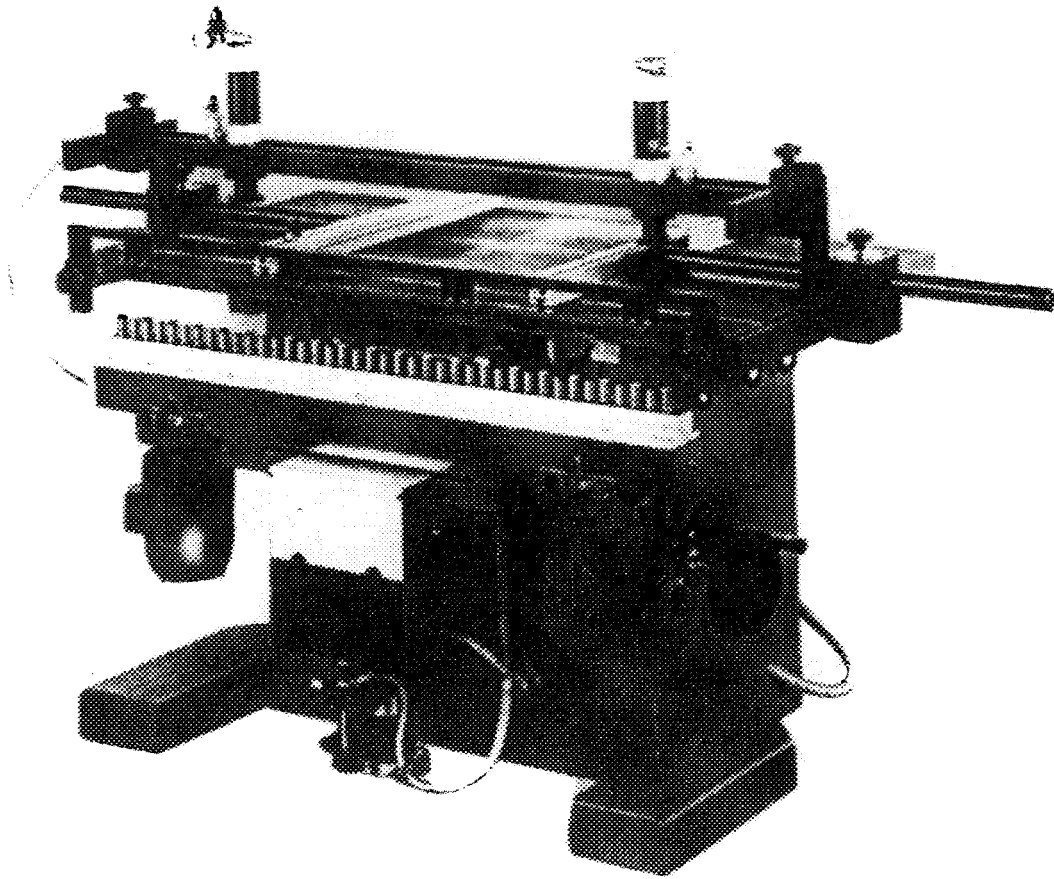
Spindle heads with fixed spindle centres for boring of narrow furniture parts
